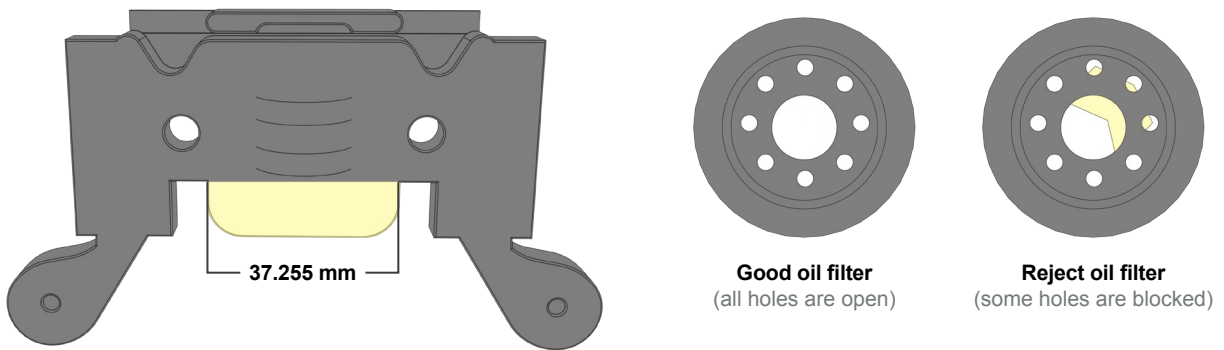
Machine vision systems can process real-time measurements and inspections on the production line, such as a machined bracket (left) or oil filters (right).
